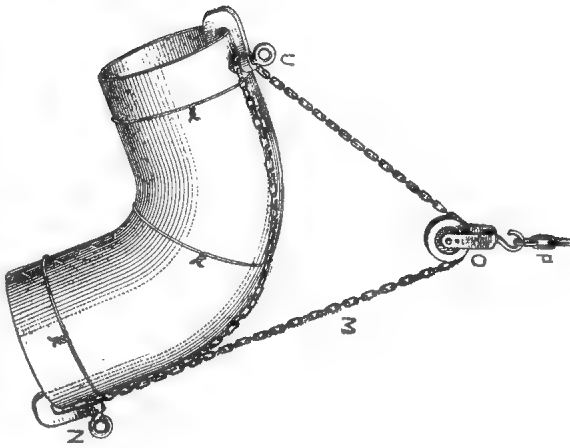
Bend Wired and Provided with Chain Clamps.
